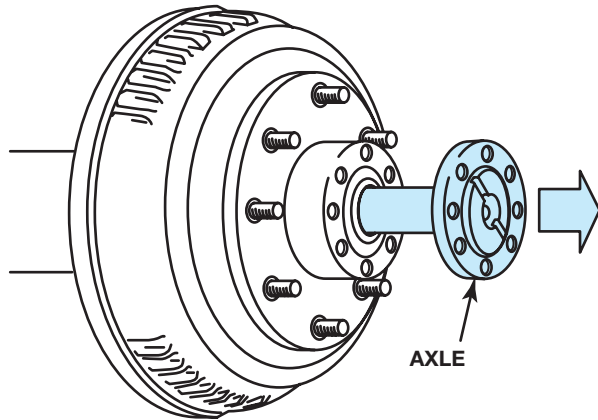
After removing the axle flange bolts, a full-floating axle can be slid out of the housing. This permits access to the axle, wheel bearings, and brakes.
